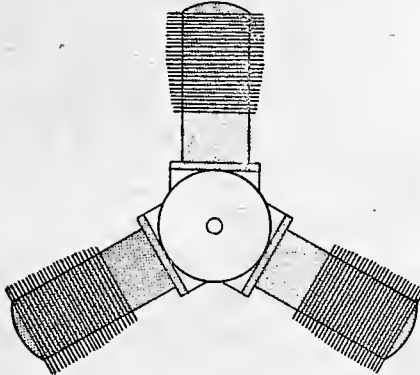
Three-cylinder  $60 \times 60$  mm. bore and stroke.
